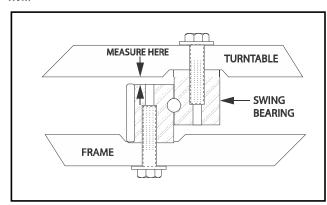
Swing Bearing Tolerance Measuring Point
